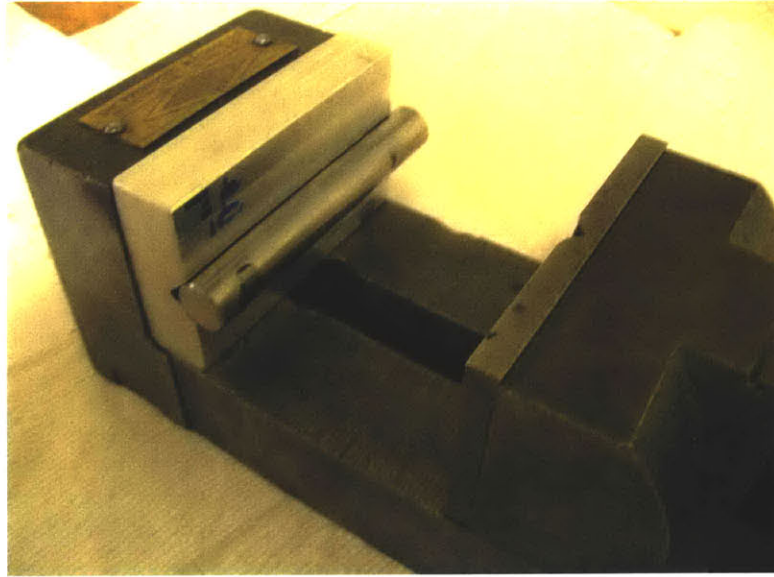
Mould shaft for fabrication of rubber bearings.
